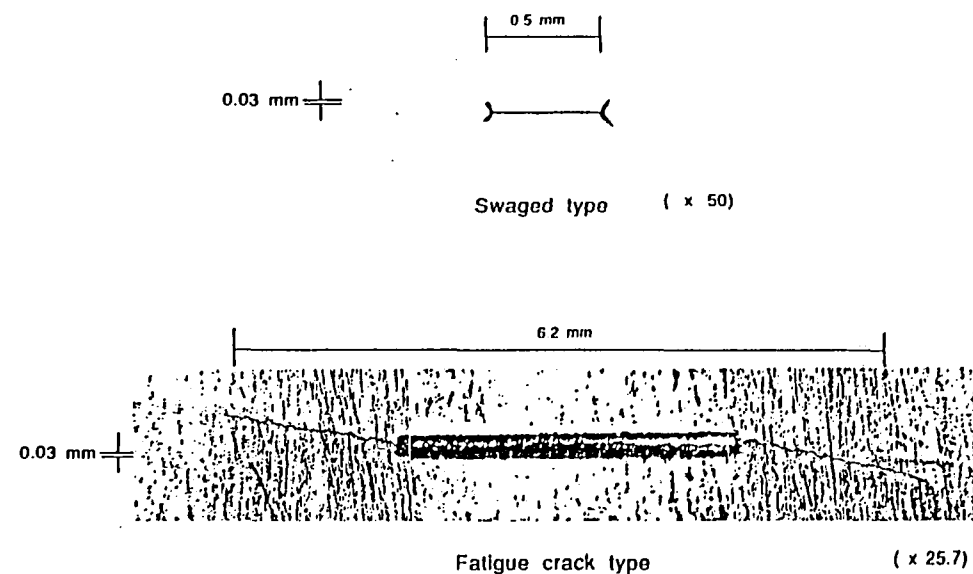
Test pieces of swaged type and fatigue crack type
